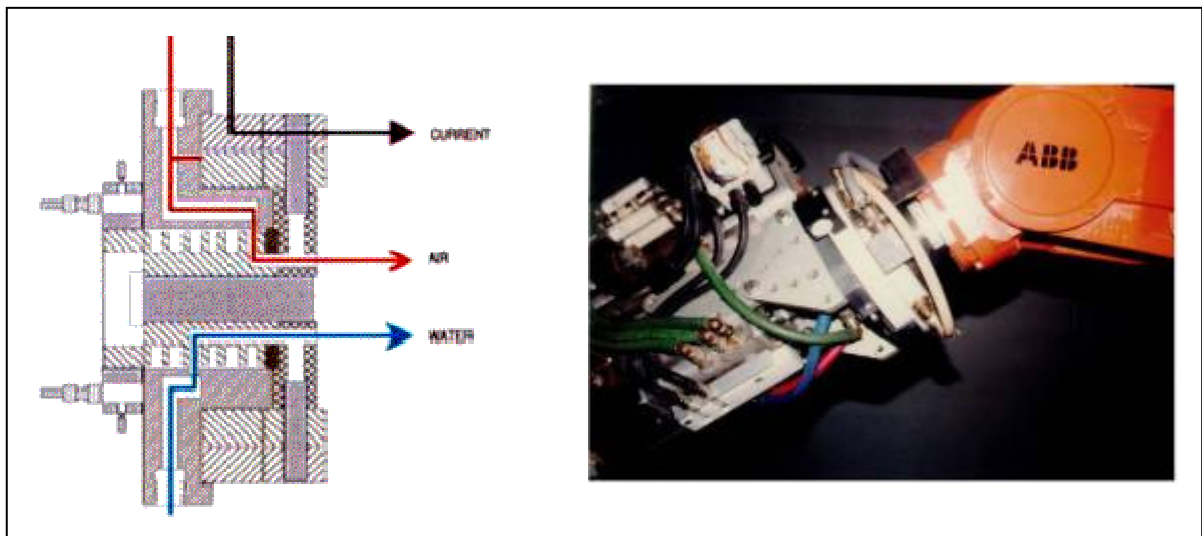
A typical spot welding 'swivel'
